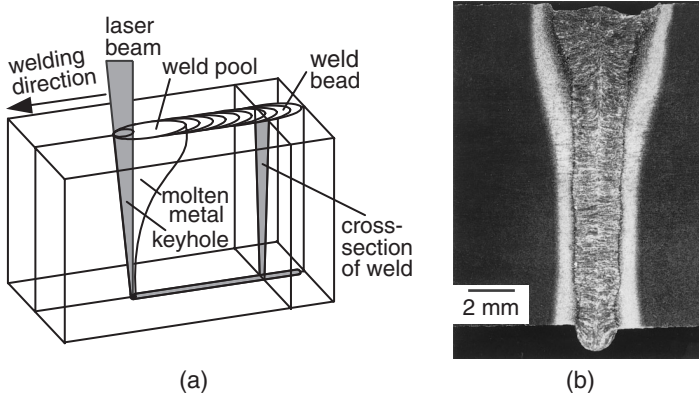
Laser beam welding with CO₂ laser: (a) process; (b) weld in 13-mm-thick A633 steel. (b) Courtesy of E.A. Metzbowler.
